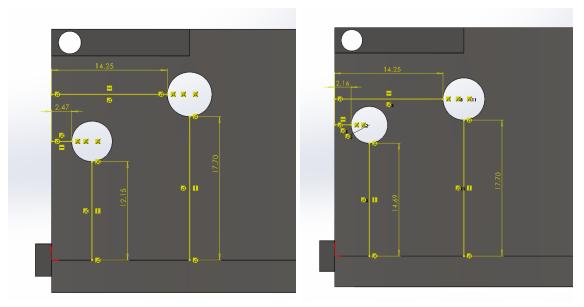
Comparison of Idle Gear Locations. The image on the left shows the location of the 30 tooth idle gear for the 4:3 gear train. While the image on the right shows the location of the 20 tooth idle gear for the 16:30 gear train.
